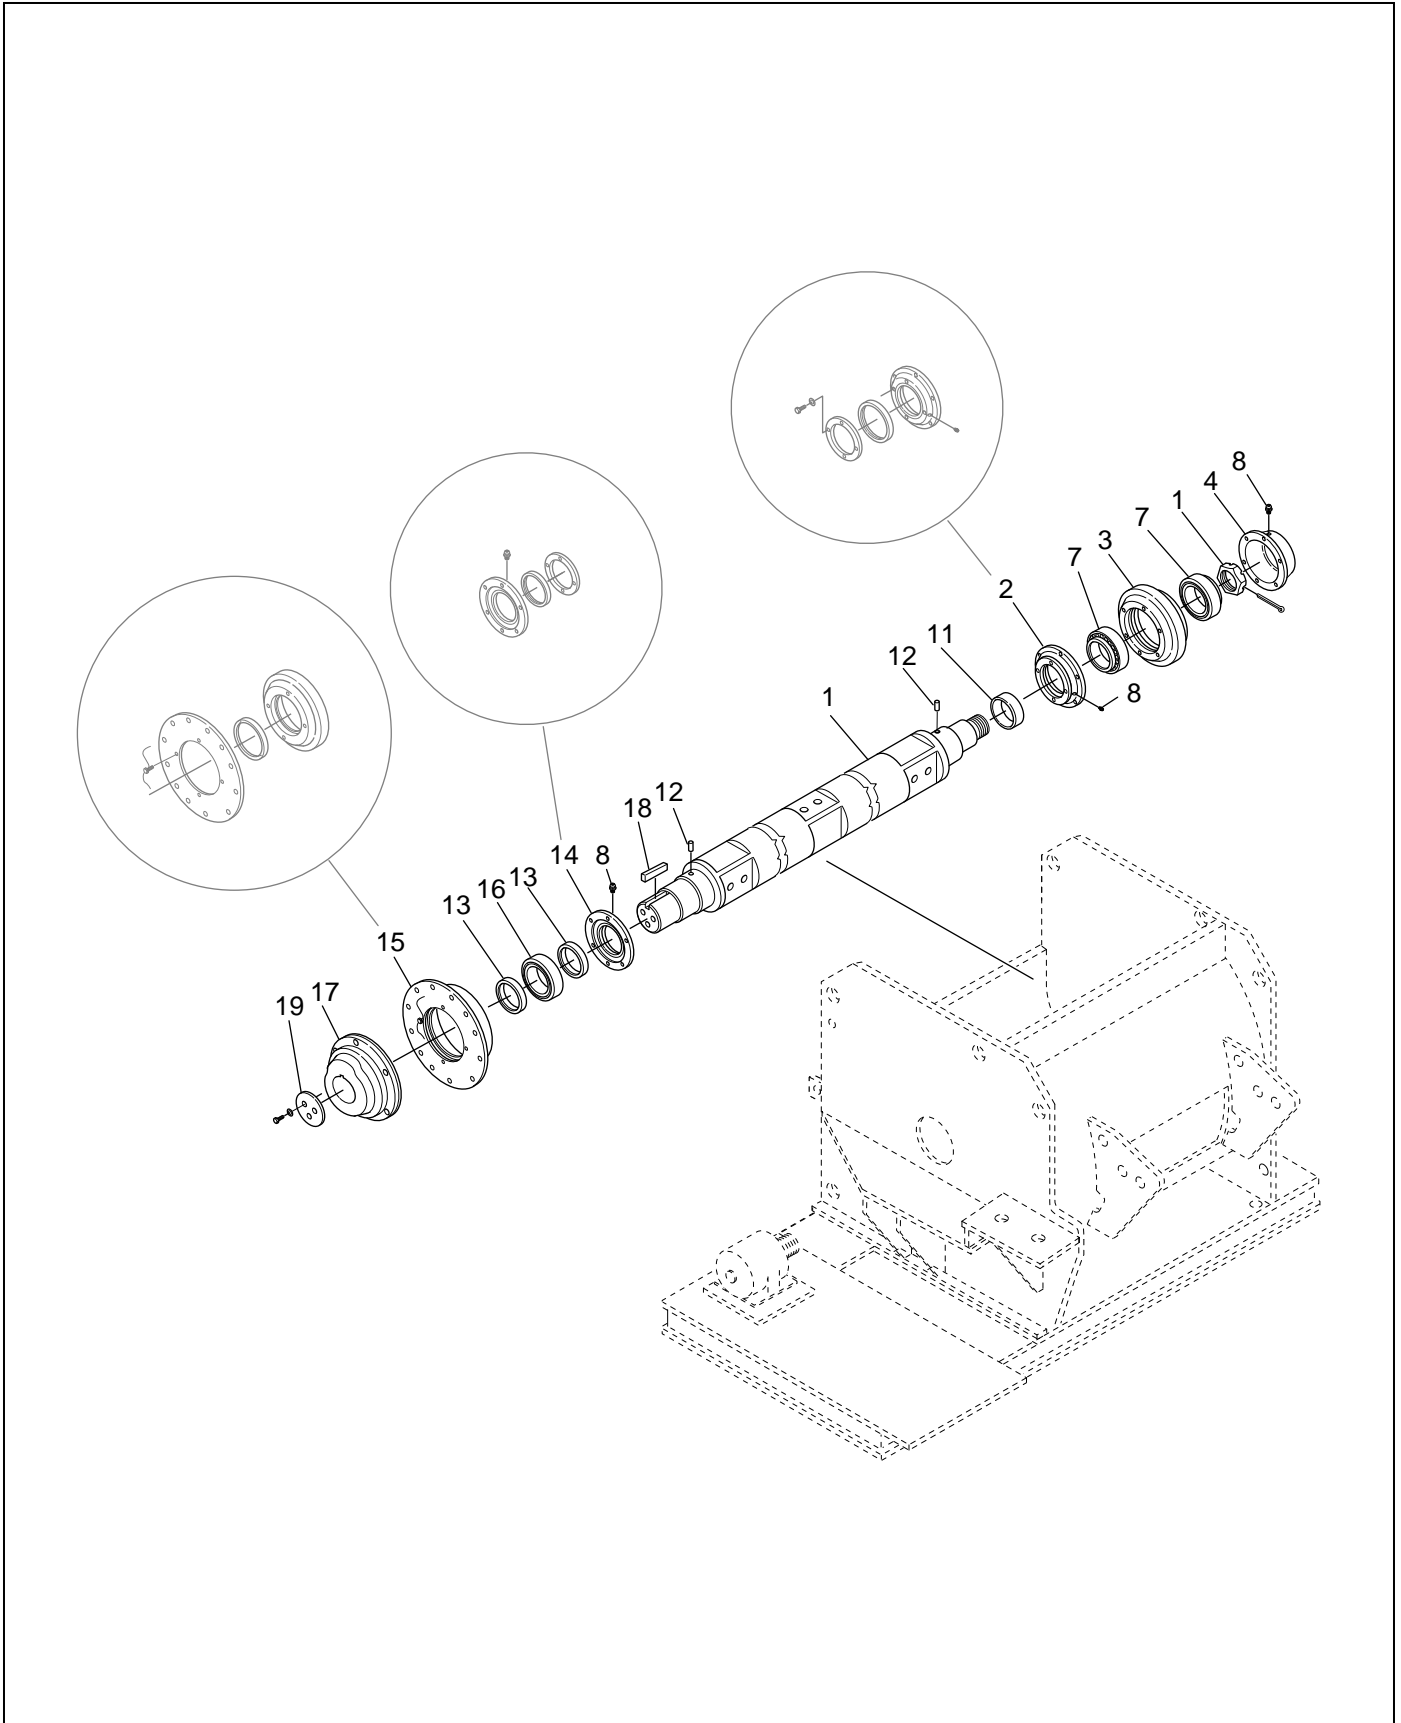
Blade Shaft Subassembly – Timken and Hyatt Bearings (#312506)
